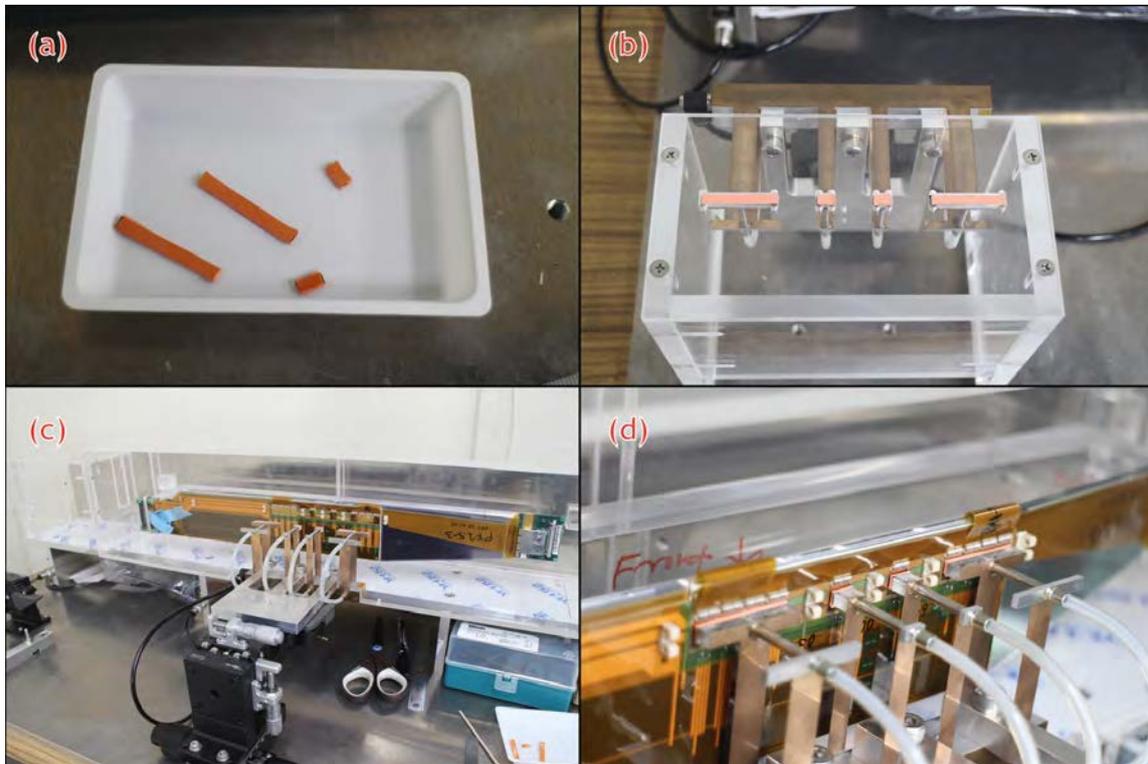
Main steps of Keratherm attachment on an origami board of a Layer 4 ladder. (a) the Keratherm strip is cut into four pieces; (b) the pieces are positioned and aligned on the Keratherm-jig; (c) the Keratherm-jig is positioned on the movable stage that is used to align the strips with the ladder; (d) Keratherm strips are attached to the APV25 chips of an origami board.
